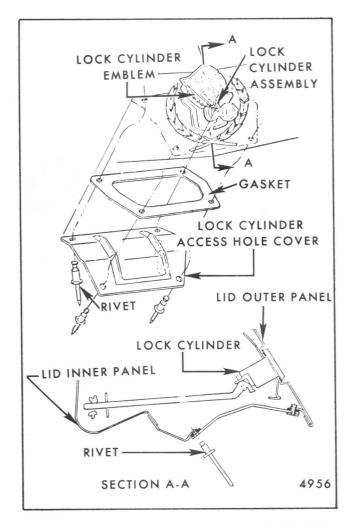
Lock Cylinder Access Hole Cover - Cadillac "E" Style
